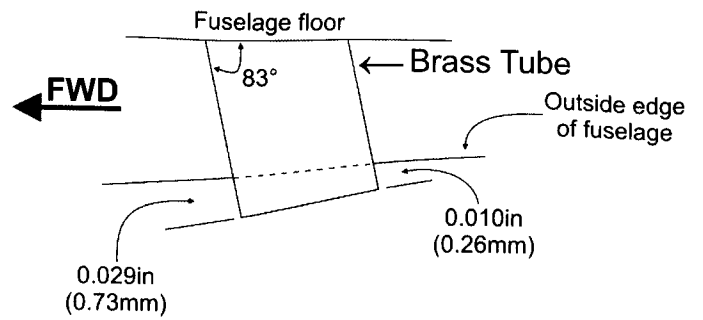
DRAWING ABOVE SHOWS THE CHAMFER REQUIRED
